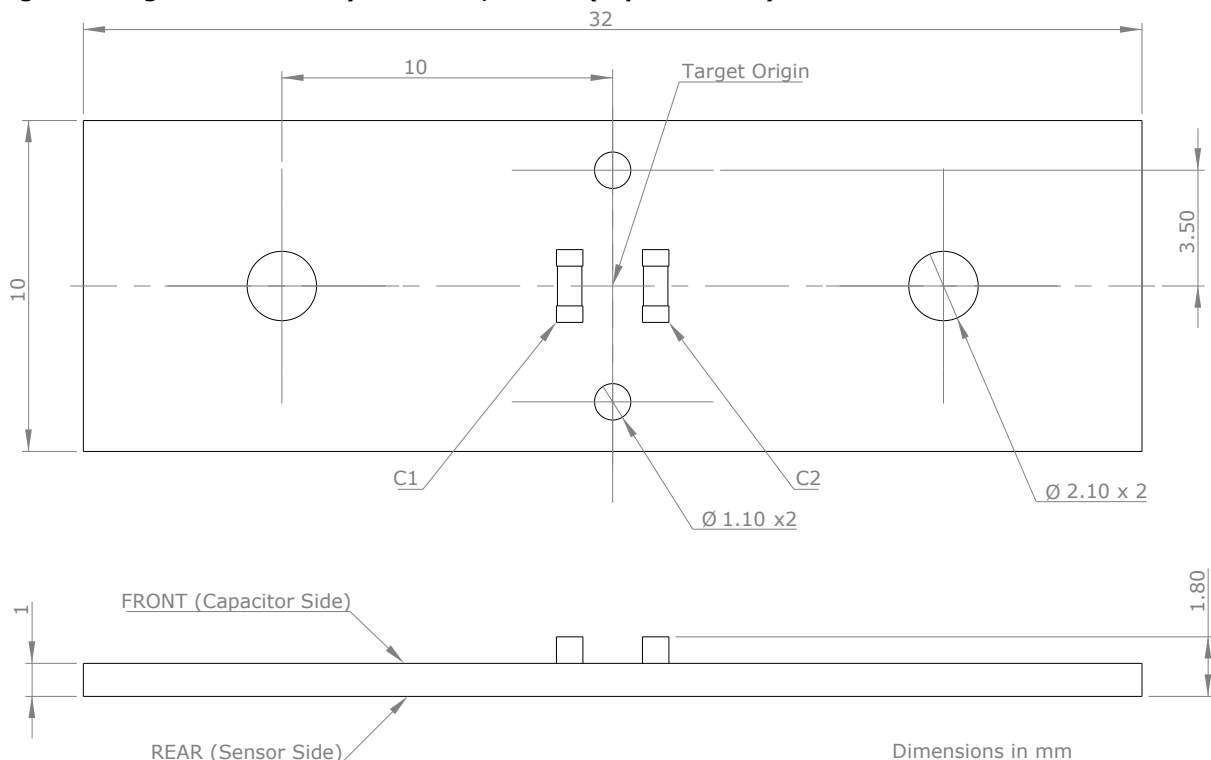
Mechanical drawing, target PCB assembly 013-1043
